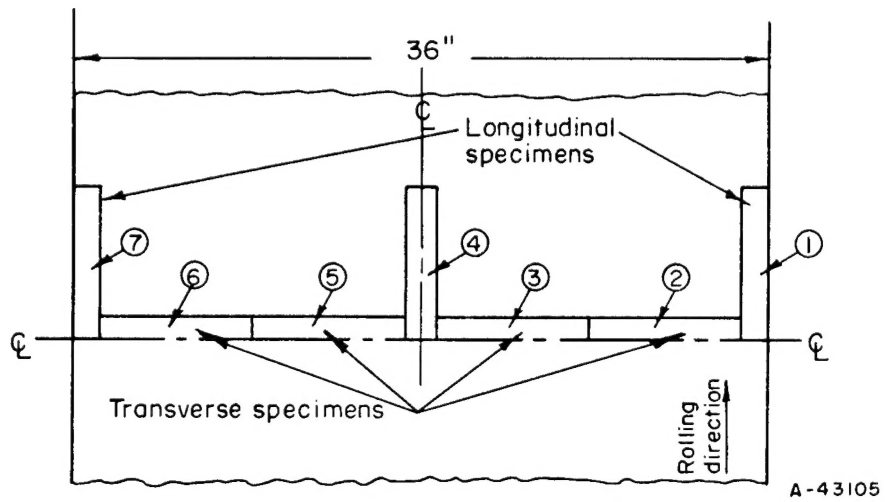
LAYOUT OF TENSILE-TEST SPECIMENS
